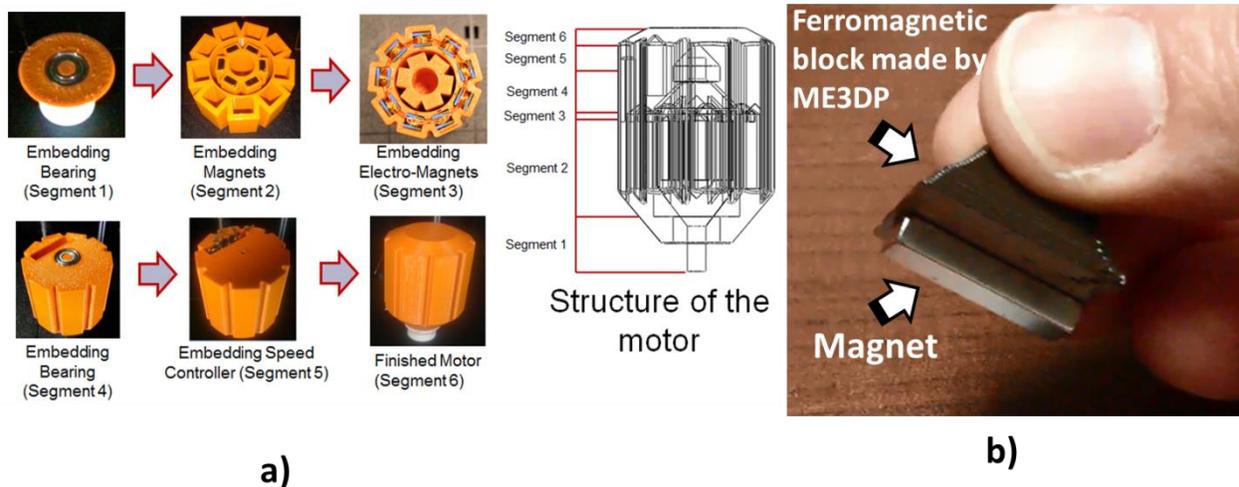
a) The process of fabricating a 3D printed motor. From reference [31]. b) 3D-printable ferromagnetic material which could be used to enhance the motor's performance.
